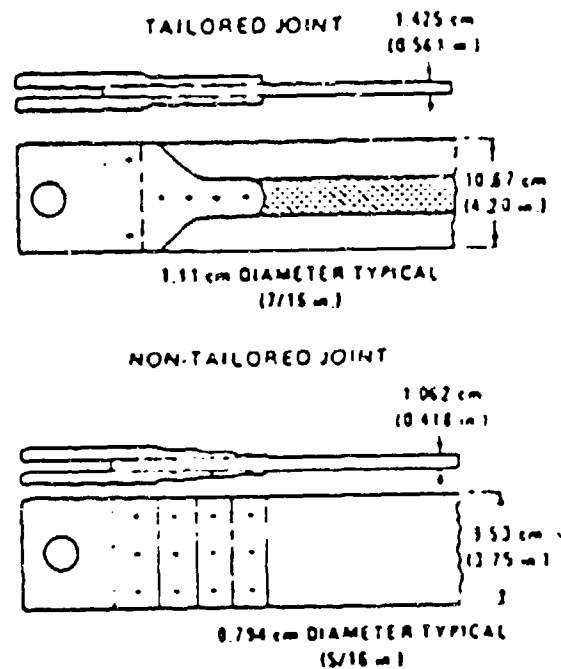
Laminate Tailoring Alters Internal Load Path in a Multifastener Joint
